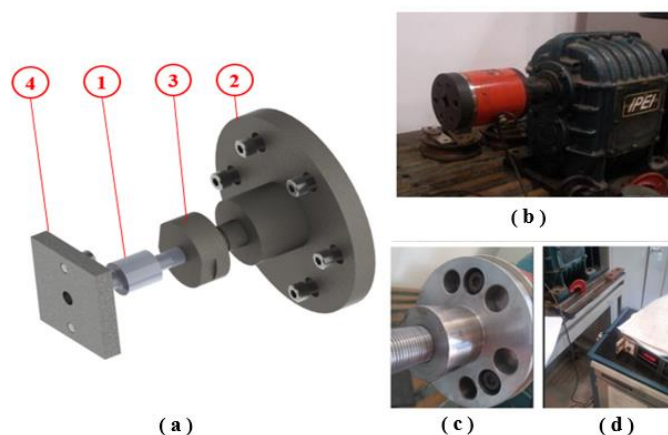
(a) Test device: (1) Specimen (2) Transmission plate (3) Tensile-torsional shaft (4) Cantilever plate (b) Torque machine (c) Fixing device on torque machine (d) Data acquisition of torque machine
